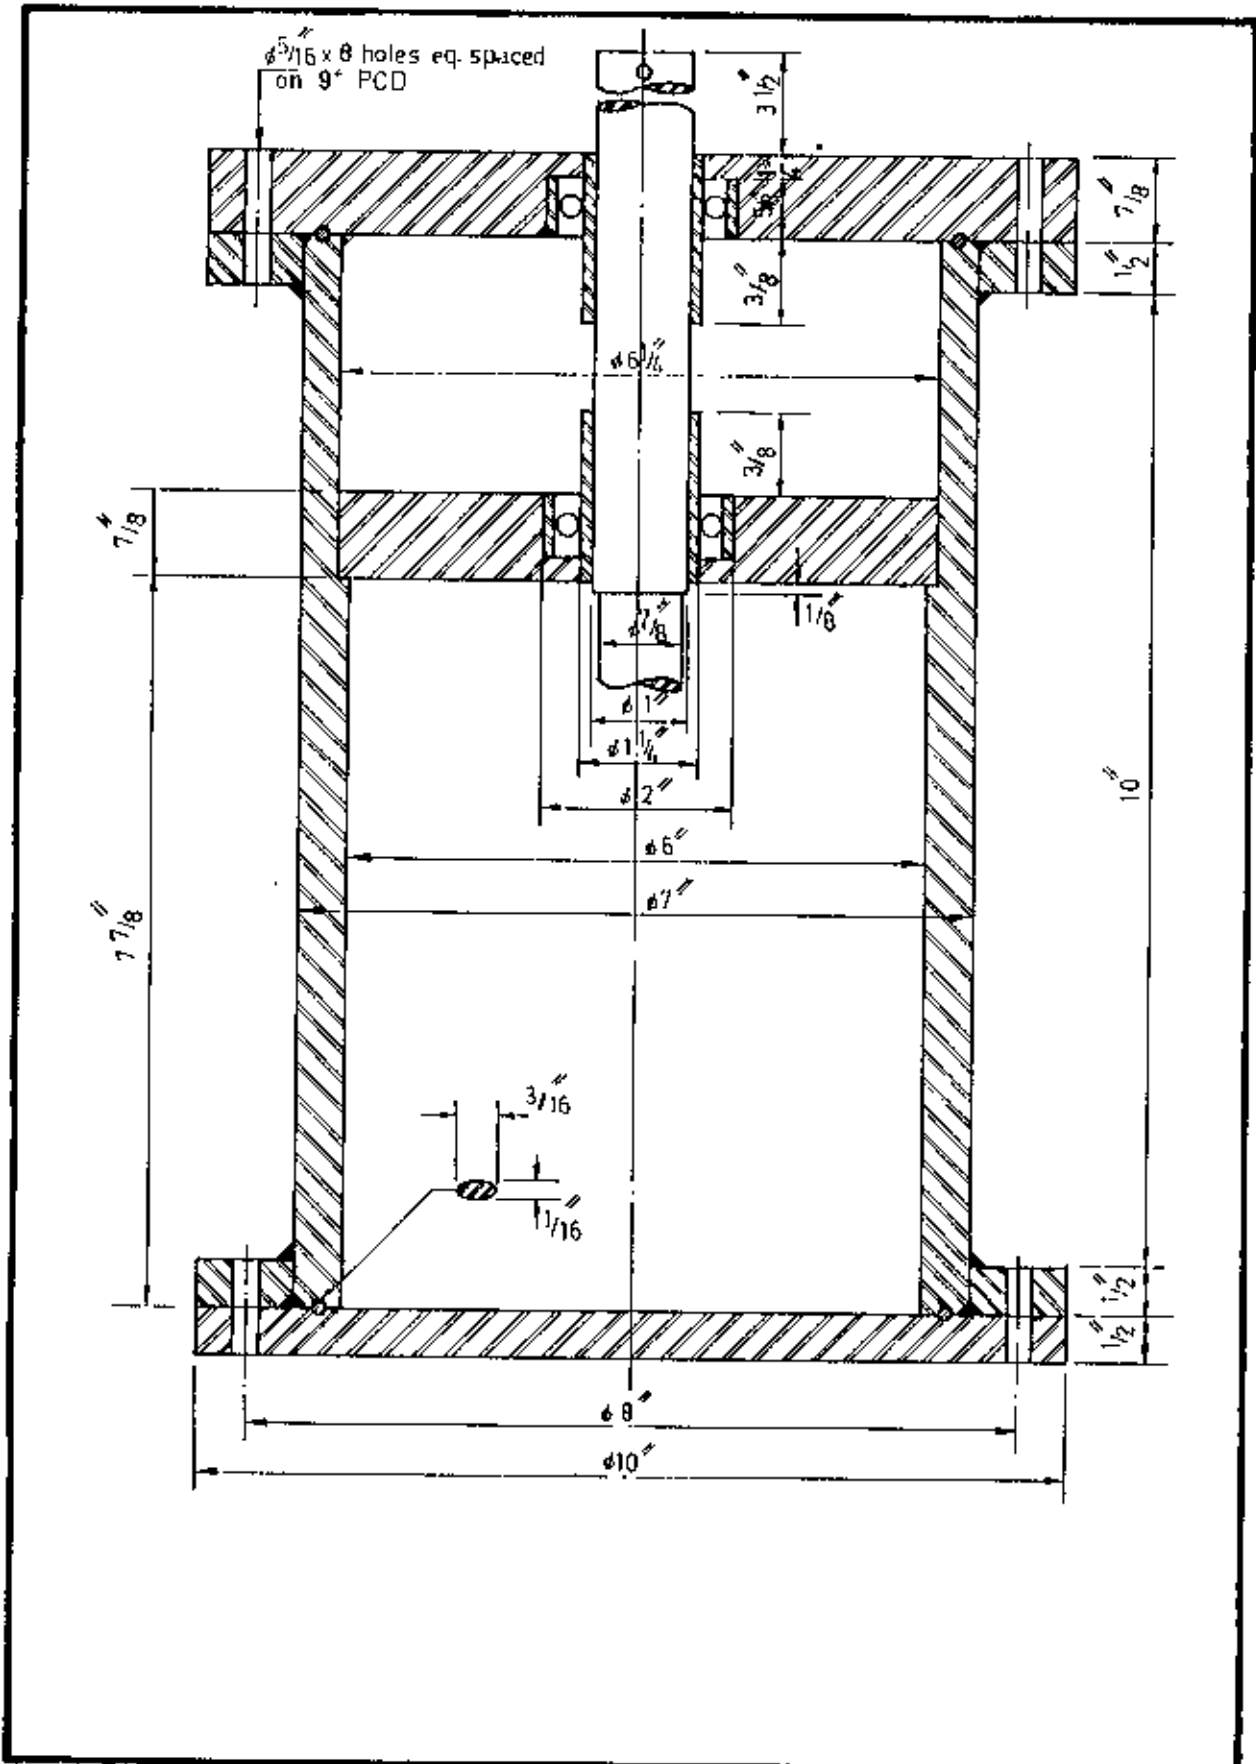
ATTRITOR CHAMBER ASSEMBLY AND DETAILS
